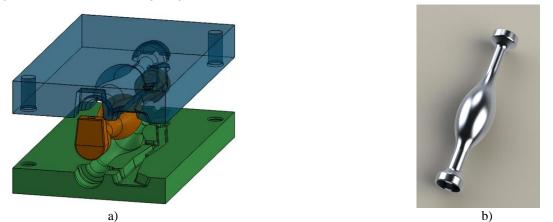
a) Casting tool intended for casting a barricade post; b) Photorealistic image of a barricade post
